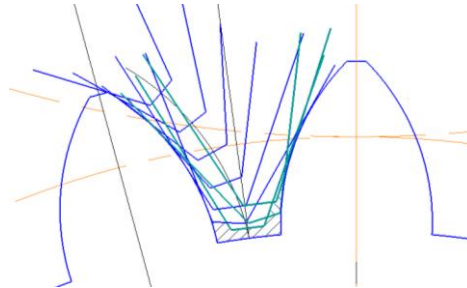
The array of tooth contours and construction of the cross-section of the cutting surface formed by this set during tooth milling with the worm cutter
